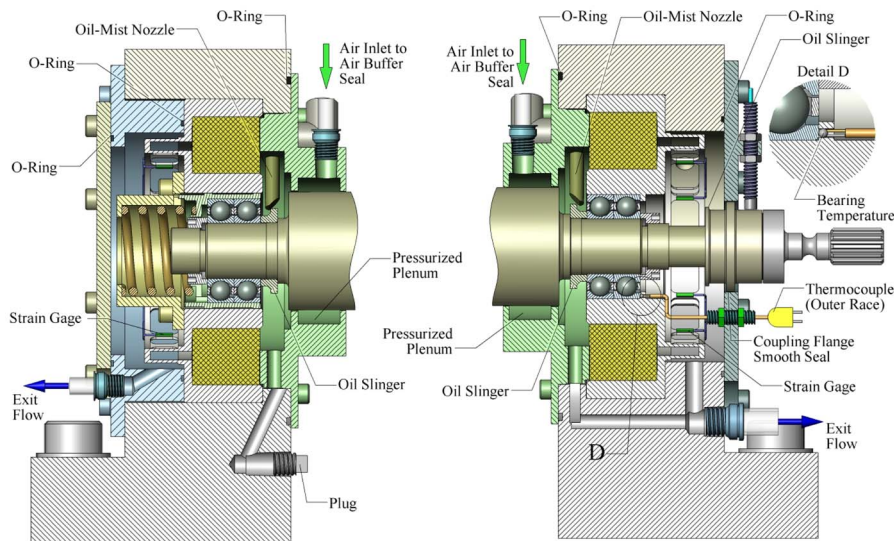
Floating end and fixed end bearing pedestal cross sections
